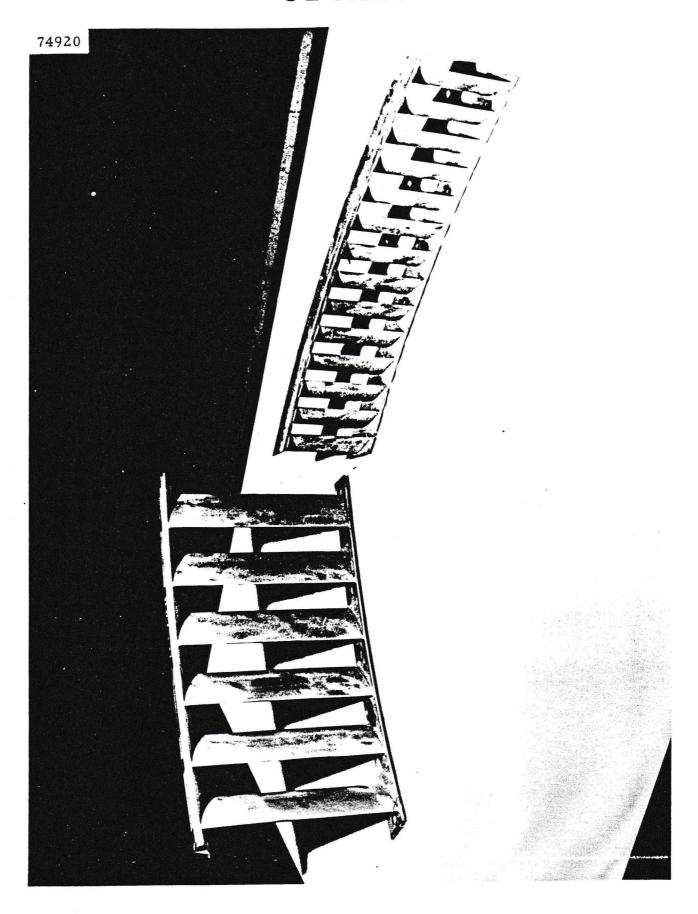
COMPRESSOR AND TURBINE BLADE SEGMENT ASSEMBLIES AFTER NICKEL ALLOY BRAZING
